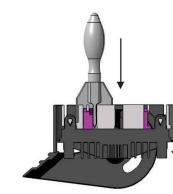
38-way connector, operating tool in final position Abb. 8 Kabelbaumstecker 38 polig; Betätigungswerkzeug in der Endposition
